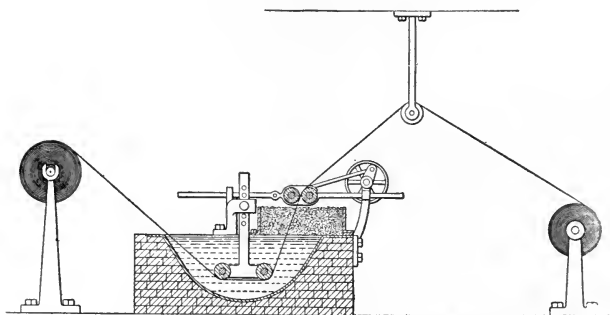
AUTOMATIC WIRE GALVANIZING MACHINE
